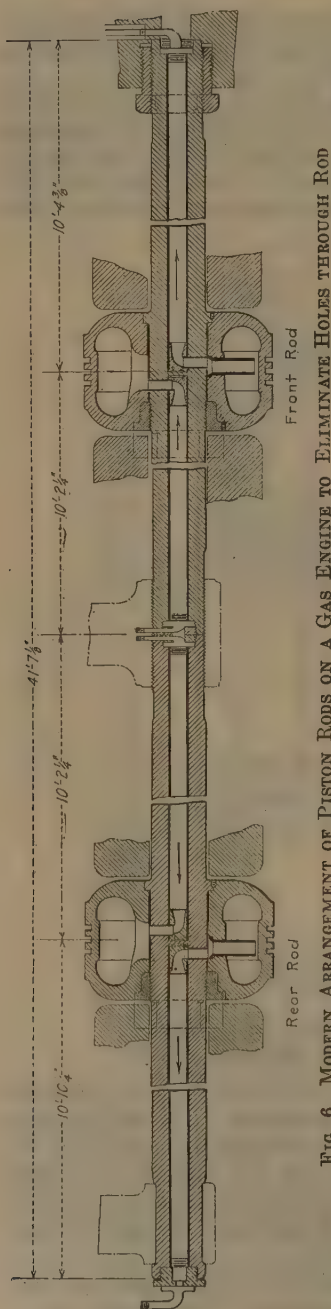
MODERN ARRANGEMENT OF PISTON RODS ON A GAS ENGINE TO ELIMINATE HOLES THROUGH ROD
